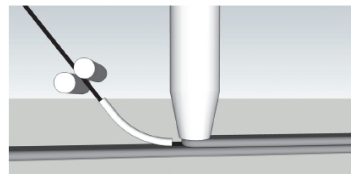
Reinforcement of structures with thin fiberglass and reinforcing wire
